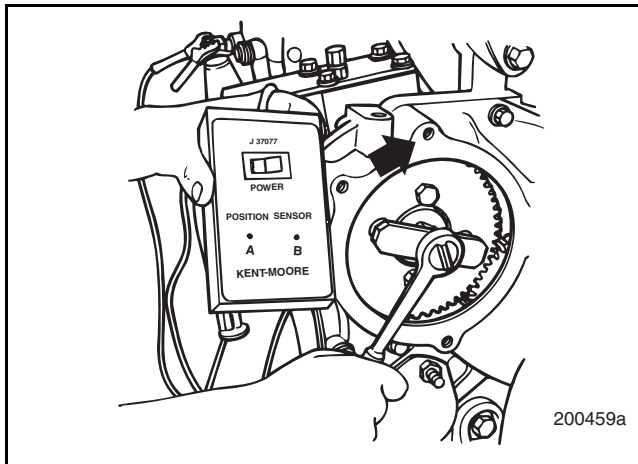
Rotating Timing Gear Hub Clockwise
